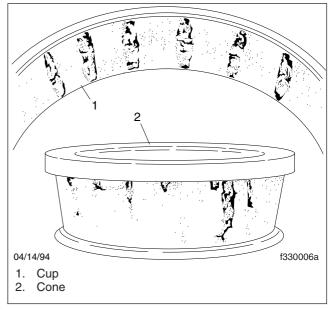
, Spalling (Flaking) of Wheel Bearing Assembly
